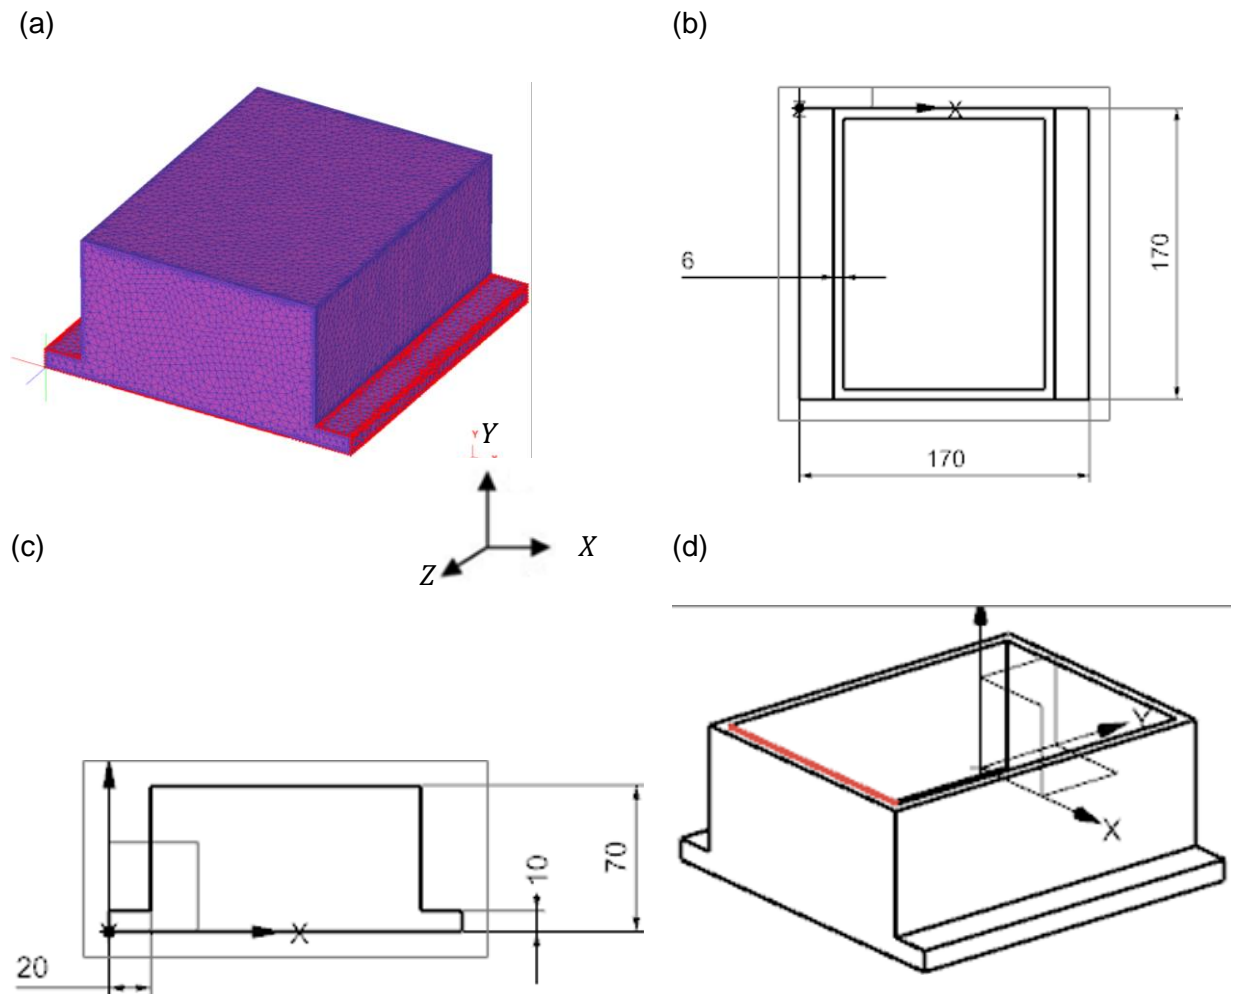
Schematic of the machined block; (a) Isometric view, (b) Top view, (c) Front view, (d) Machining FE model with boundary condition (highlighted in red).
